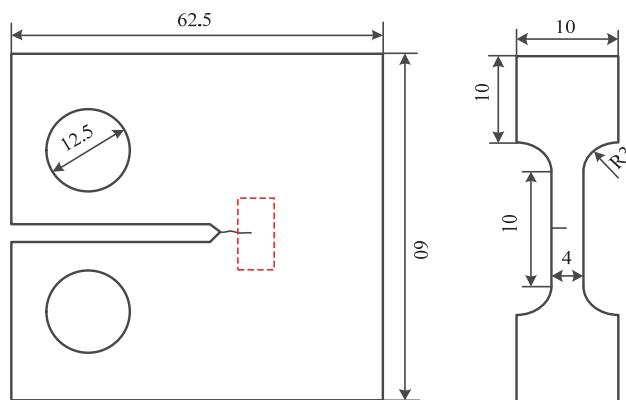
Shape and dimensions of standard CT specimen and the machined small size tensile specimen
